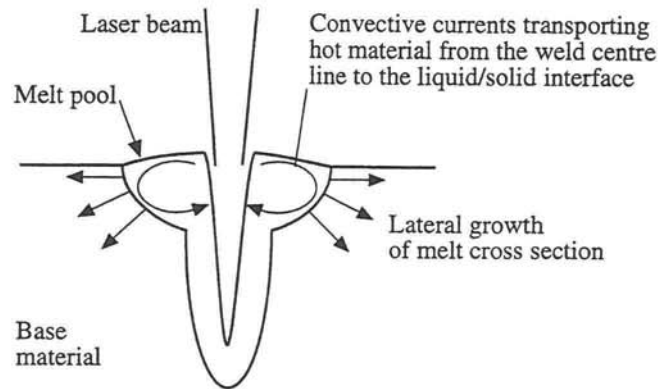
A schematic of the role of convective stirring in spreading the weld cross section.
